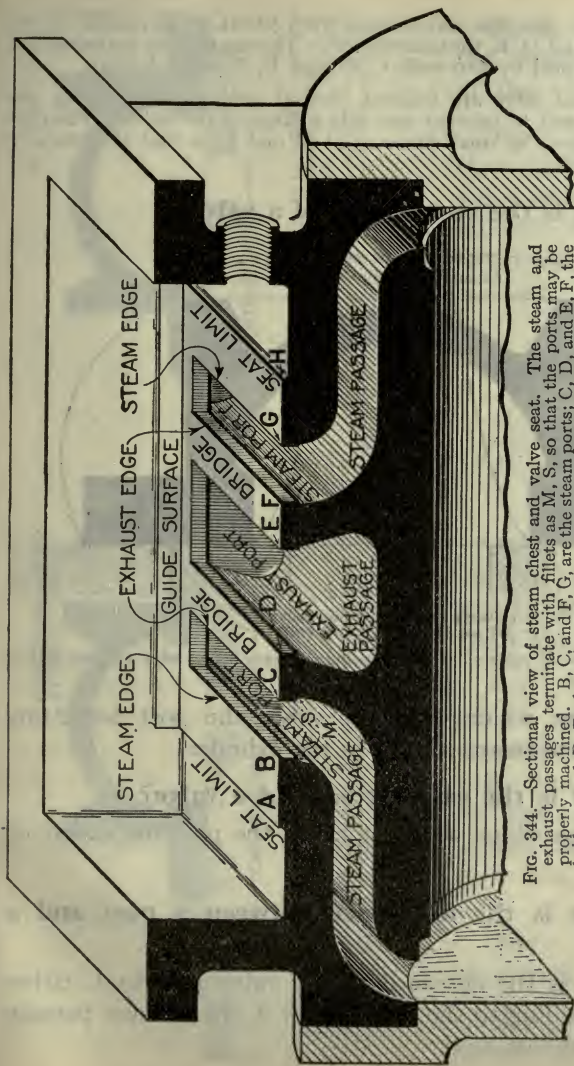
Sectional view of steam chest and valve seat. The steam and exhaust passages terminate with fillets as M, S, so that the ports may be properly machined. B, C, and F, G, are the steam ports; C, D, and E, F, the bridges, and D, E, the exhaust port. The seat extends from A to H.
